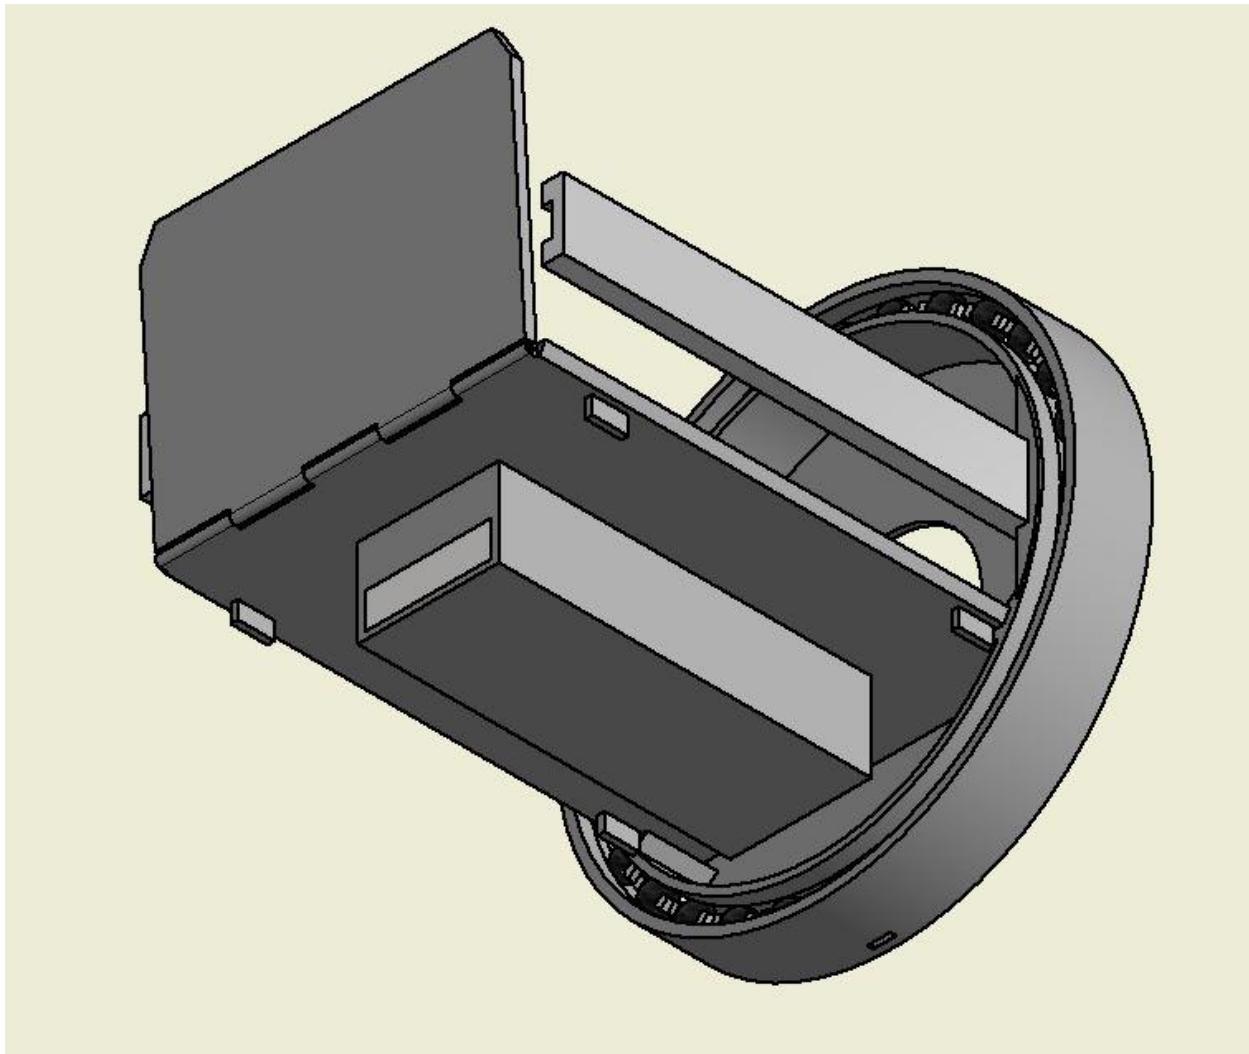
Platform and Counterweight (The Exit Bearing is suppressed in this image)
